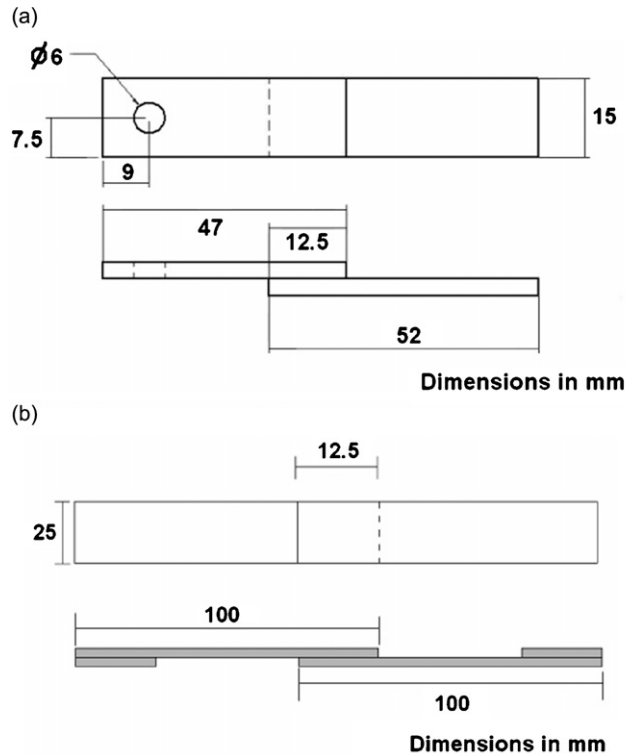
Dimensions of lap strap joint specimens: (a) impact-fatigue specimen; (b) standard fatigue specimen.
